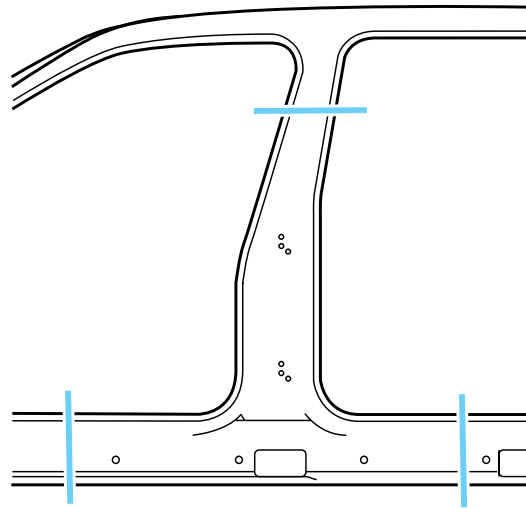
Outer Center Pillar - Sectioning Locations
